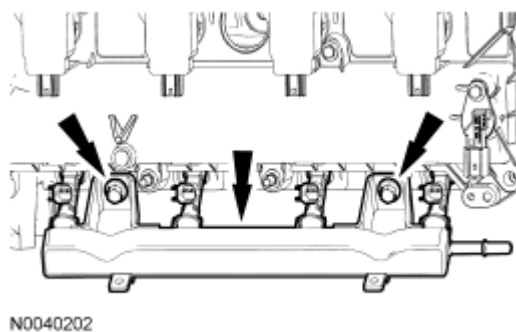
Locating Fuel Rail And Injector Assembly Bolts
